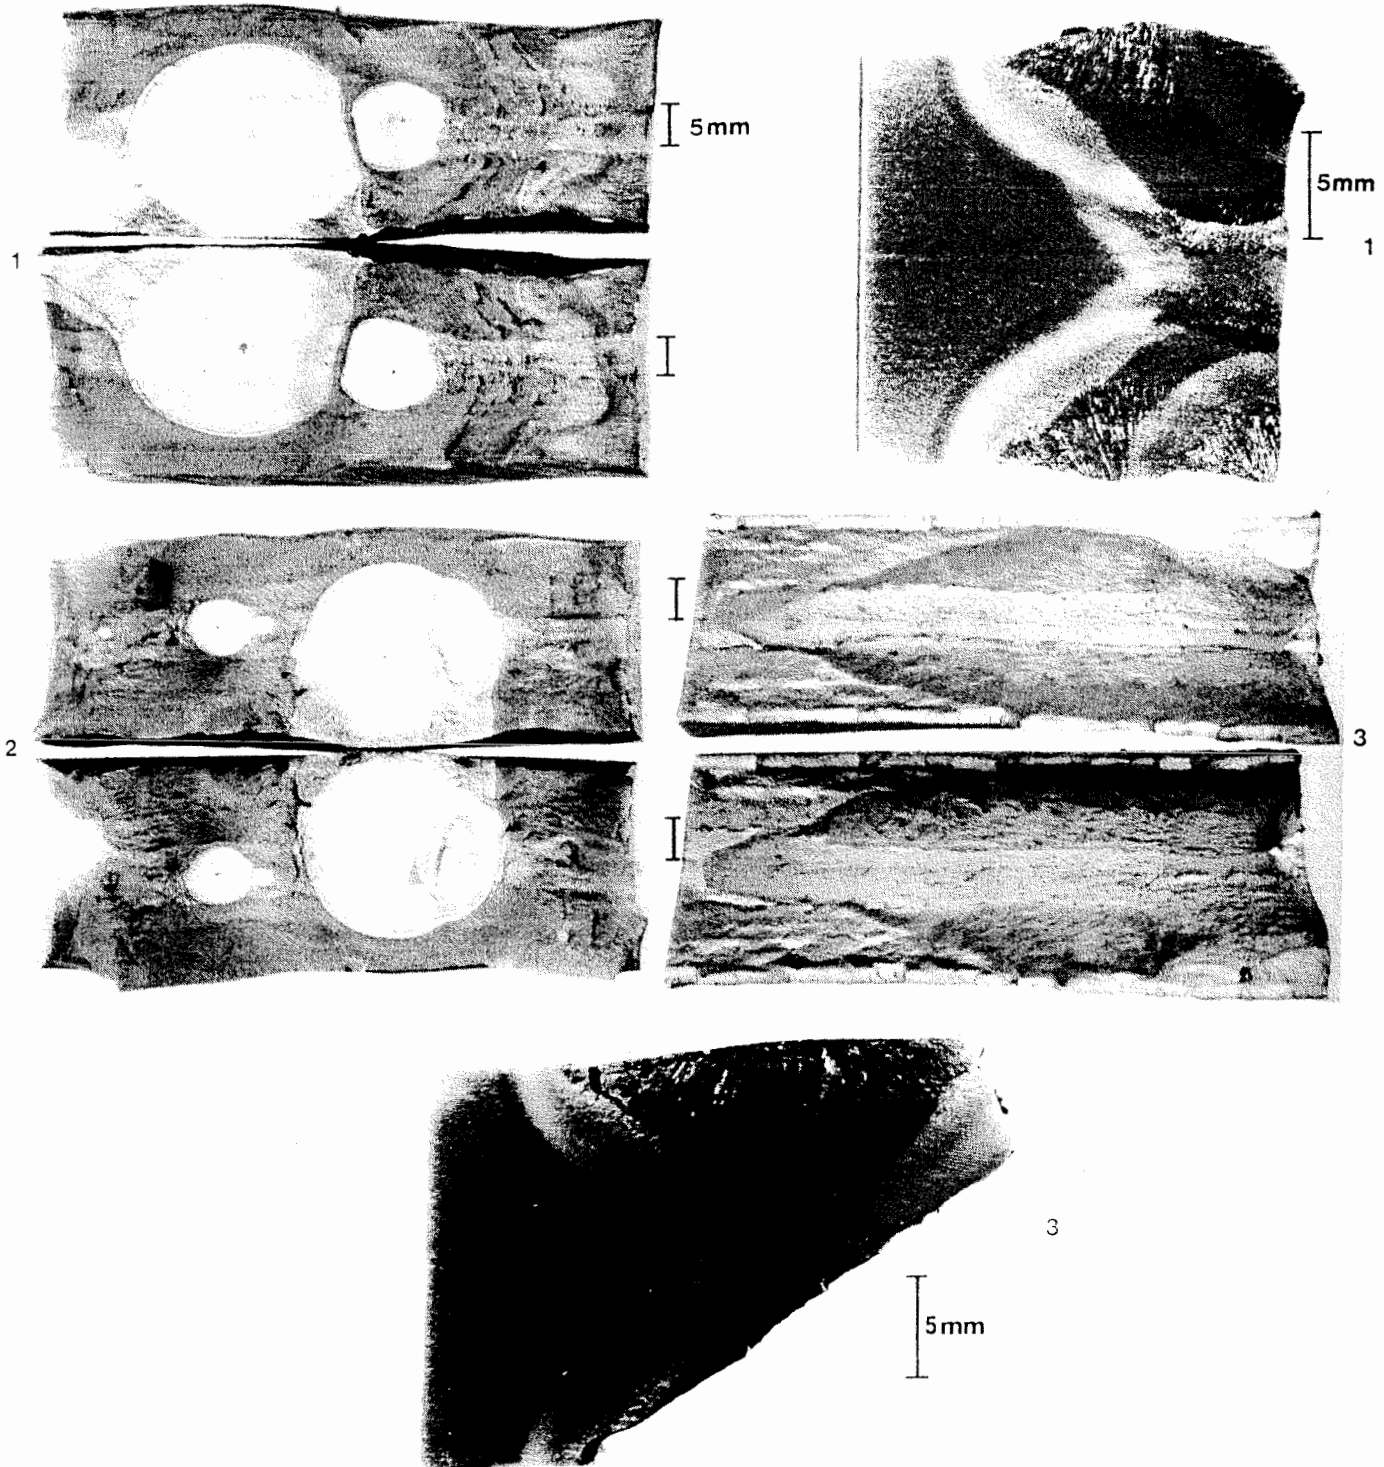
Crack initiation and growth in the butt-welded plates.
